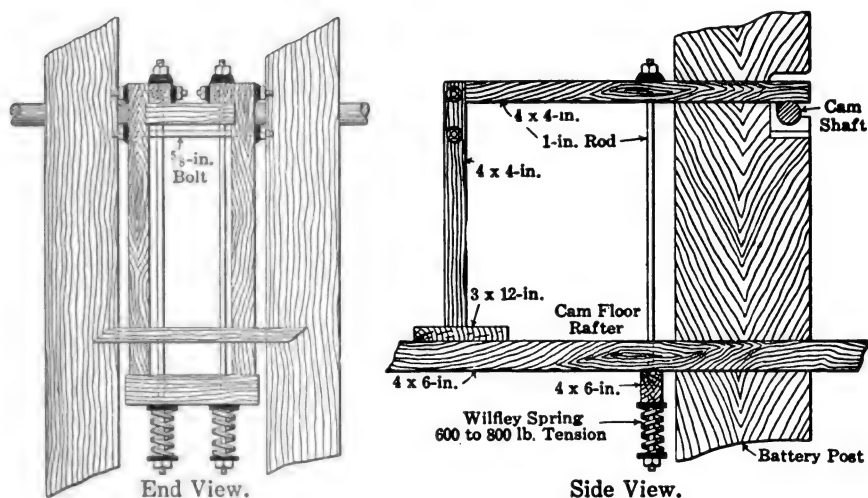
CAM-SHAFT DAMPING DEVICE AT MONTANA-TONOPAH MILL.
